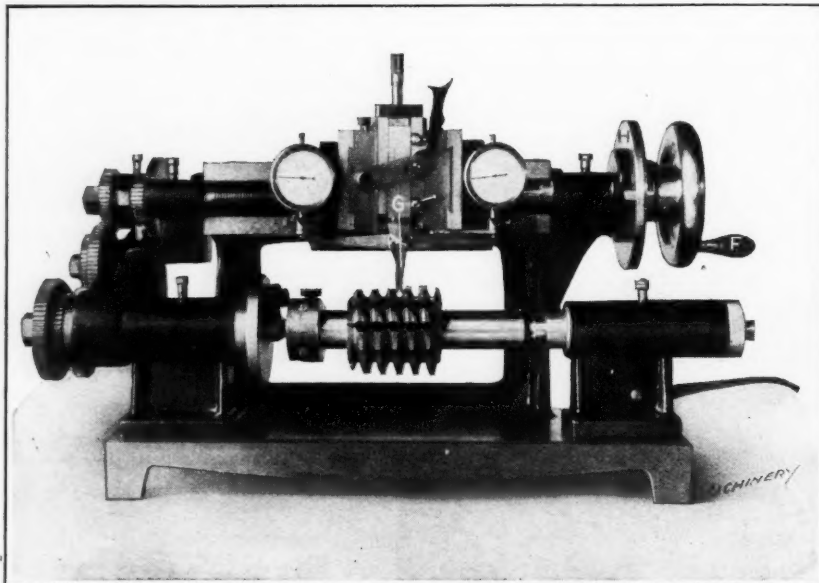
Special Hob Testing Machine now used by Illinois Tool Works
